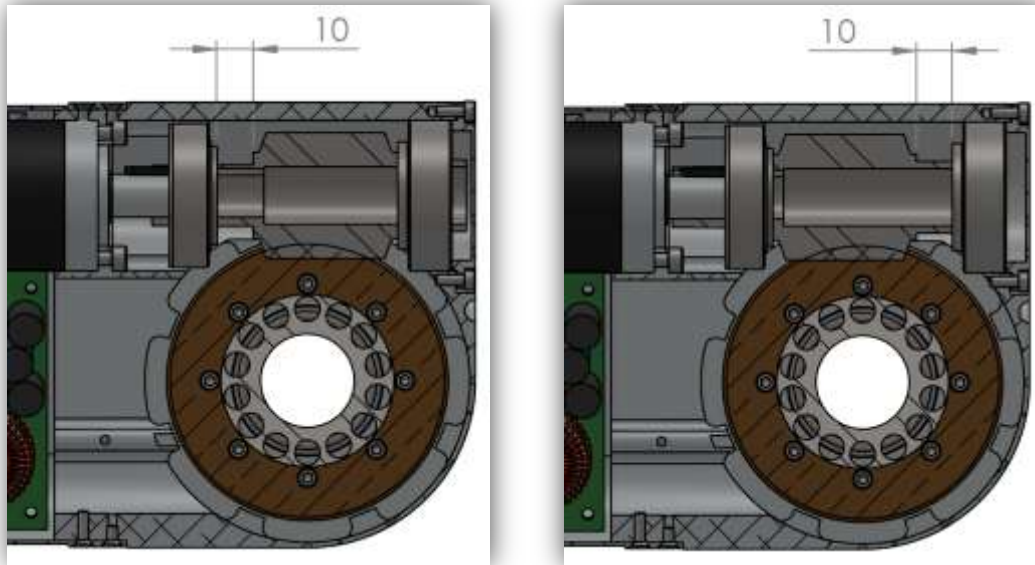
Cross-Section of Gear Housing in a) 'Loosest Position' b) 'Tightest Position'
